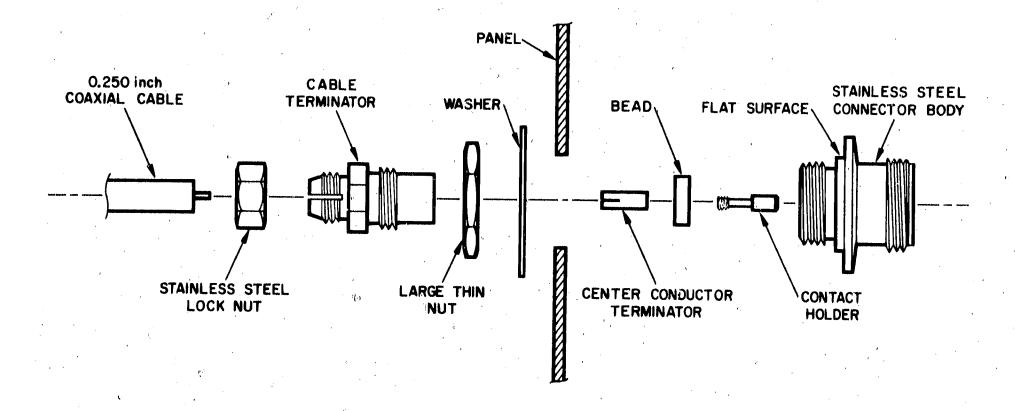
REFERENCE and TEST Channel Output and Coaxial Link Connectors Exploded View
